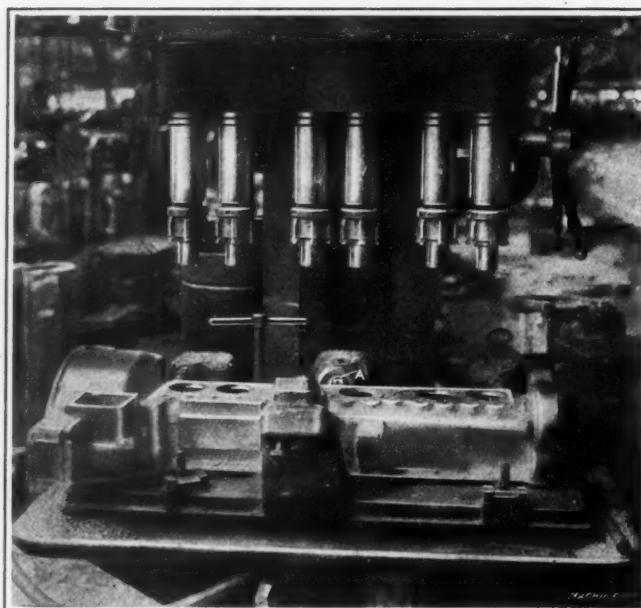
Foote-Burt Boring Machine on which Cylinder Holes are machined in Upper Halves of Crank-cases
